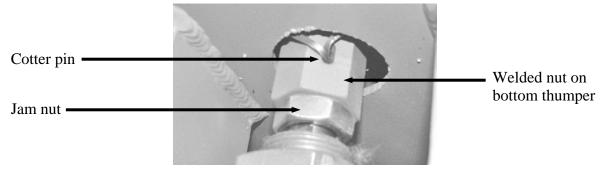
Bottom Thumper Pad Welded Nut, Jam Nut, and Cotter Pin
